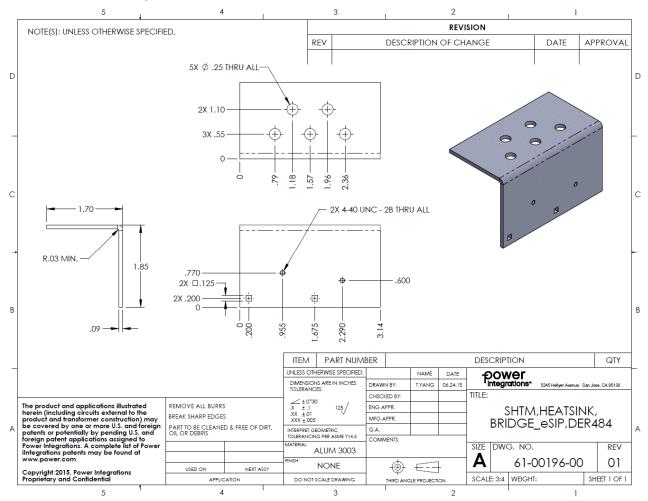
U1/BR1 Heat Sink Sheet Metal.
